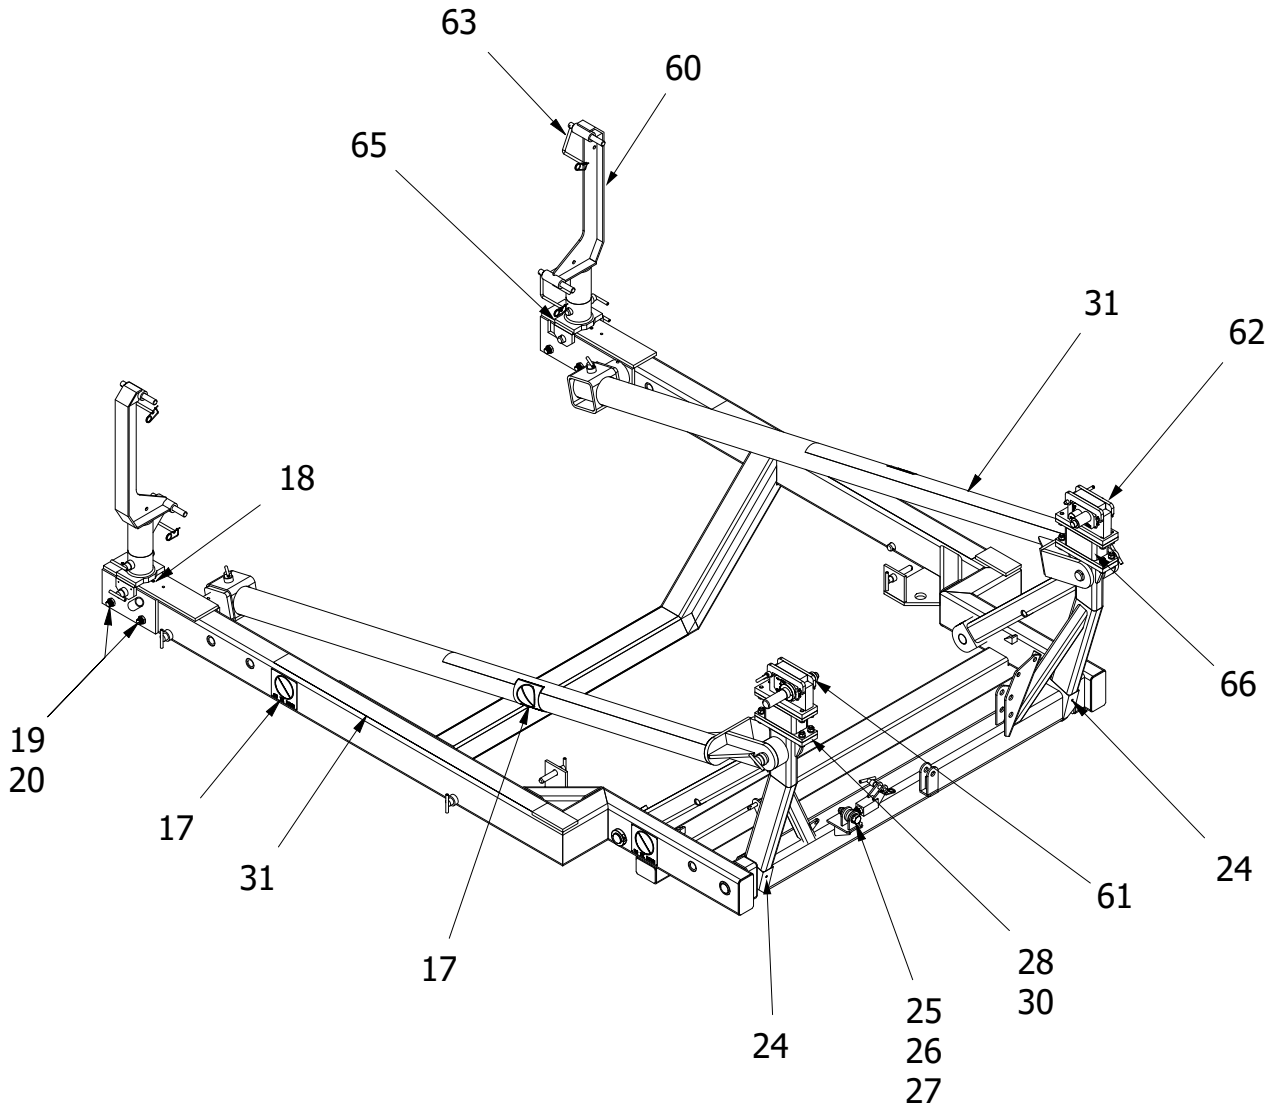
AM-1928-156-80A Cradle Assembly w/o Bootstrap Adapter for CF6-80A
